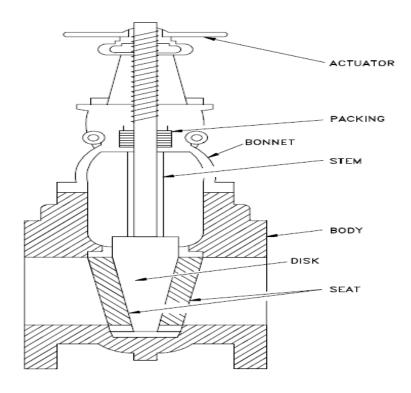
The Basic Parts of a Valve ⁽⁵⁾.
